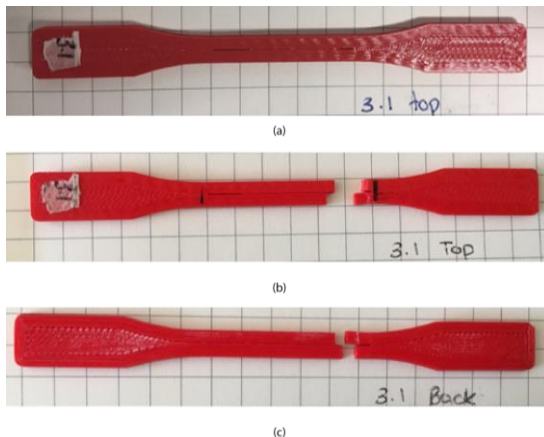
test specimen with 6 shells (a) top view, before testing (b) top view, after testing (c) bottom view, after testing
